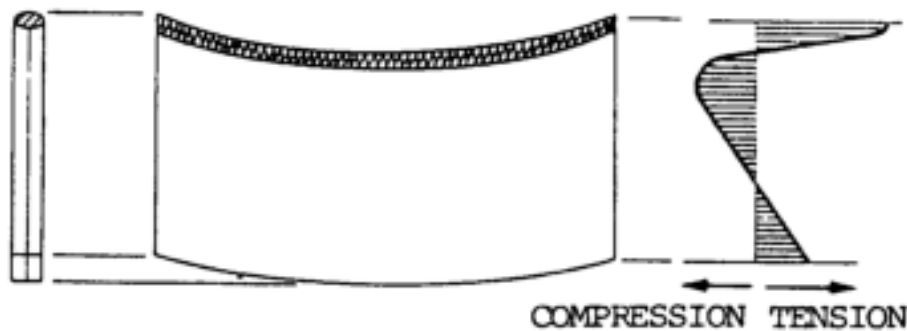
Edge welded joint -- residual stress pattern.
